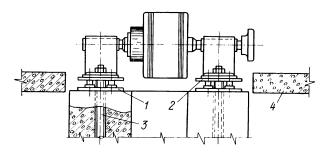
Fastening the bearing pedestal and the bed plate with a common anchor bolt
